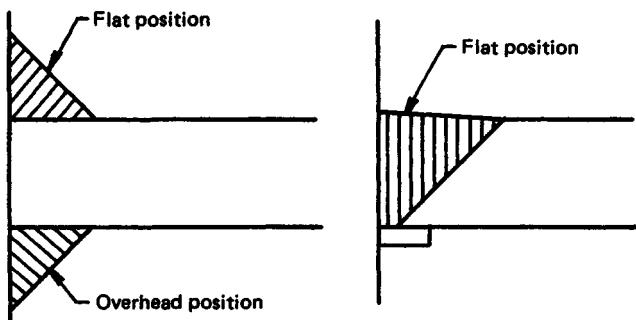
In the flat position, a single-bevel groove joint is less expensive than fillet welds in making a T joint. (*The Lincoln Electric Company.*)
